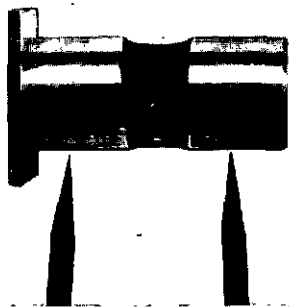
, (T465065). Inspect the turbocharger bearing
